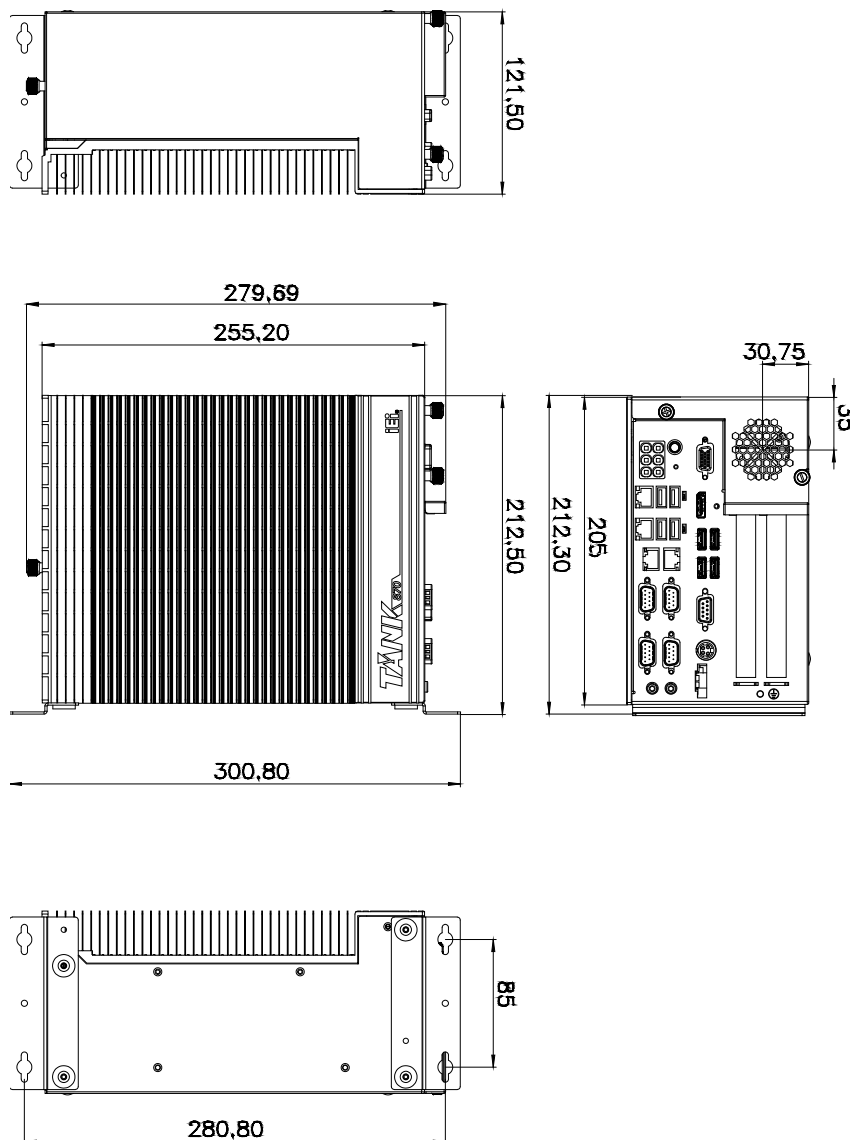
TANK-870-Q170-2 slot Physical Dimensions (millimeters)
